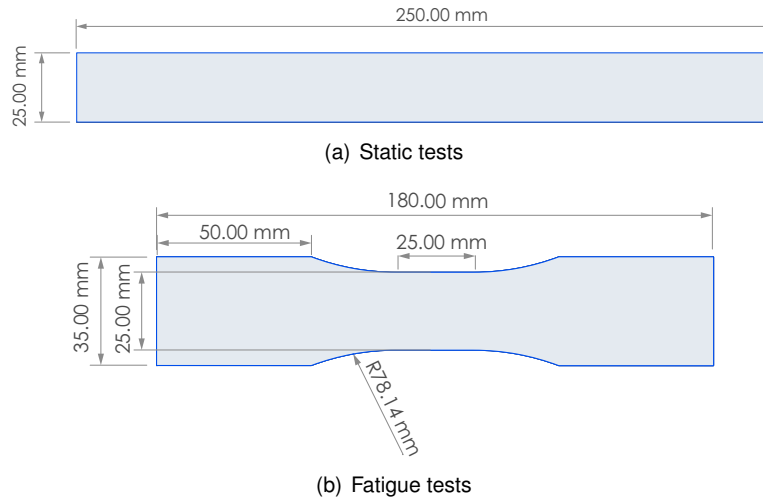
Geometry and dimensions of the specimens used for mechanical testing.
